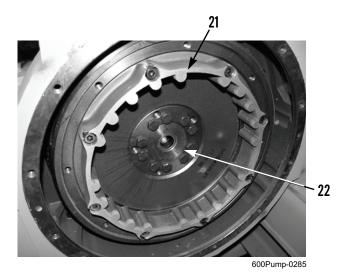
Outer Ring of Coupling and Pilot Bushing Assembly at Engine Flywheel Bore.
